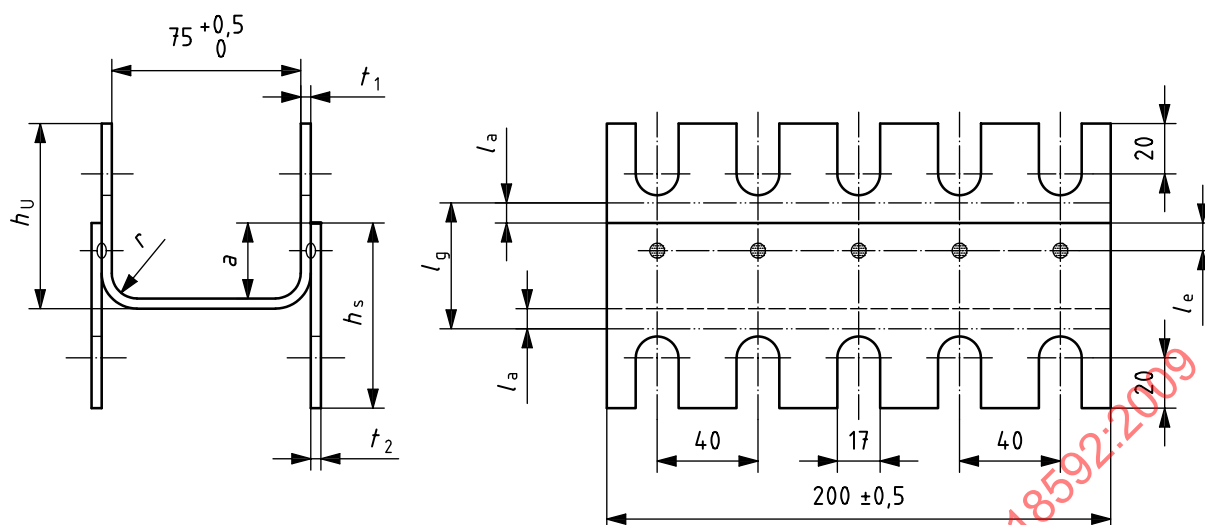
Flat multi-spot peel specimenTable 4 — Dimensions of flat multi-spot peel specimen
